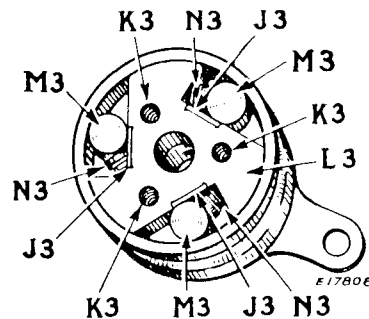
Correct Position of Driver in Open End of the Feed Clutch
